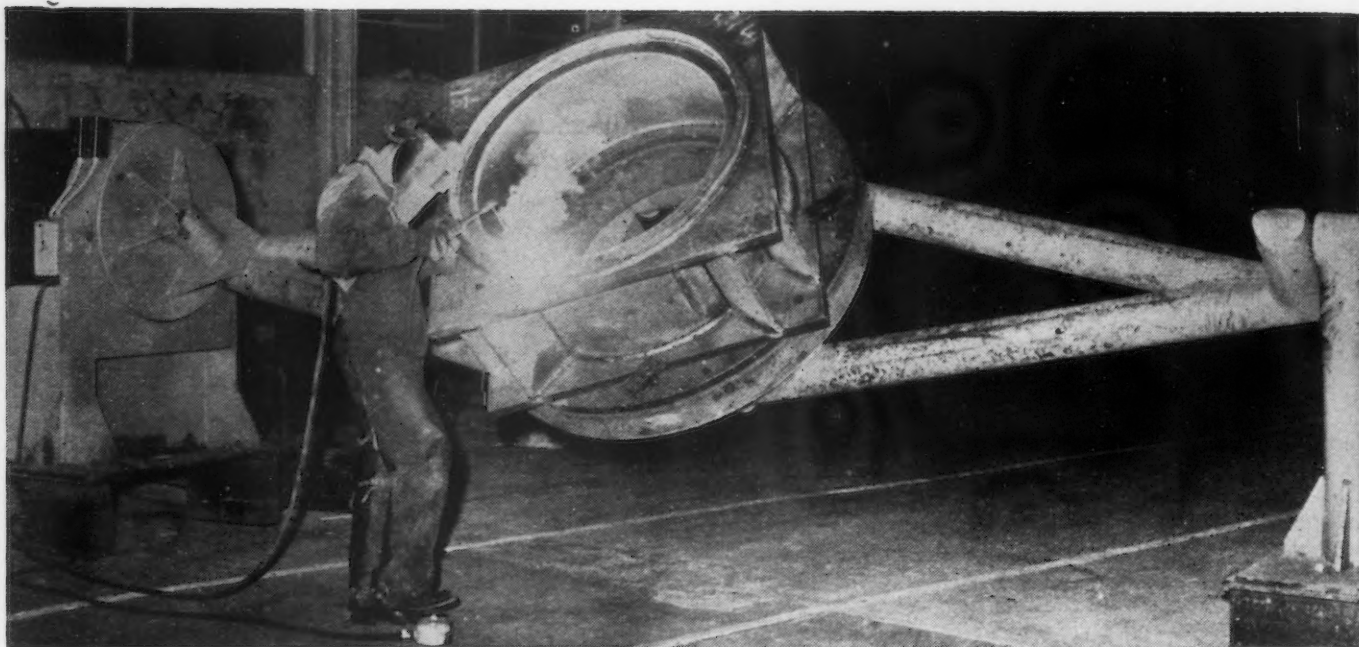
Casing pipe of 6 $\frac{5}{8}$ -in. o.d. forms the chief structural members of this large size welding positioner.
